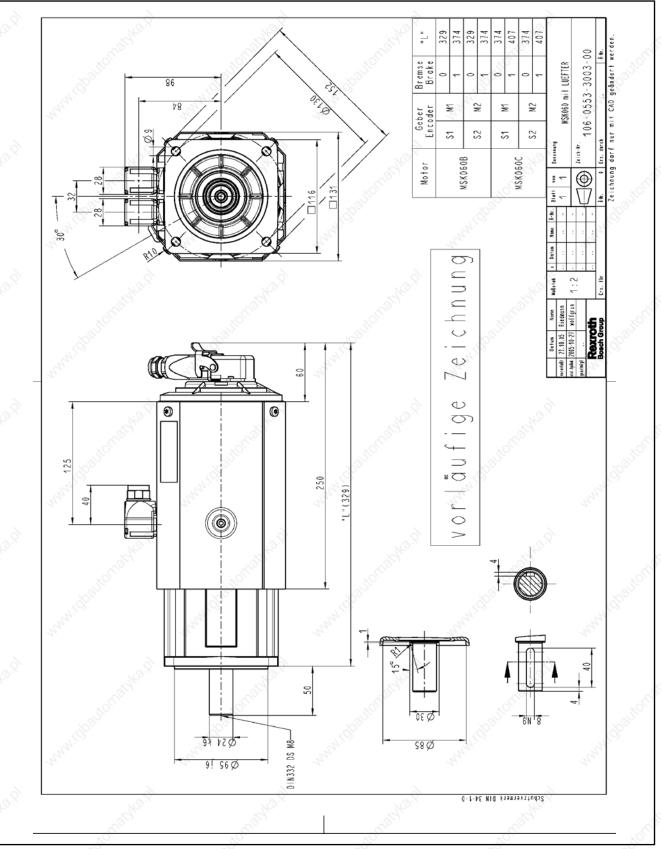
Dimension sheet MSK060 with axial fan unit
